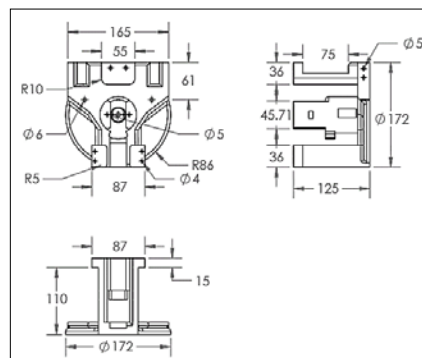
Sections of the robotic hand base (dimensions in mm).
